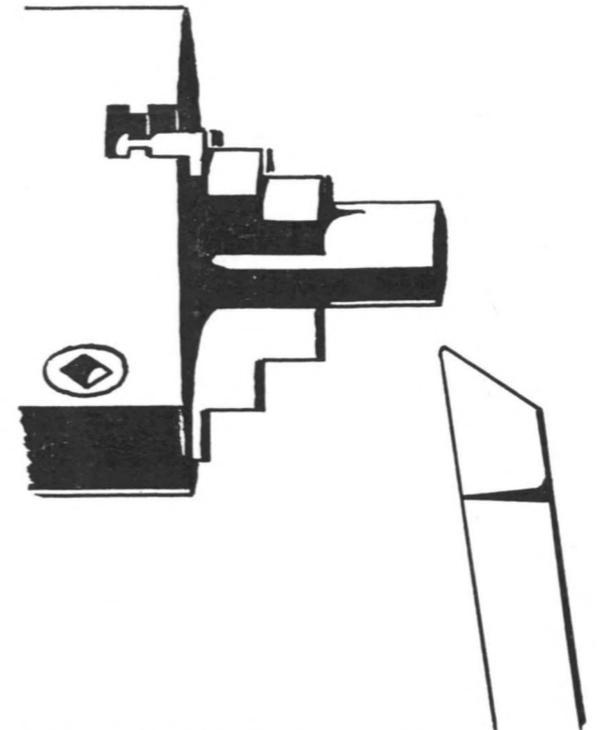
A tool this shape can be used for facing and turning at the same setting.
